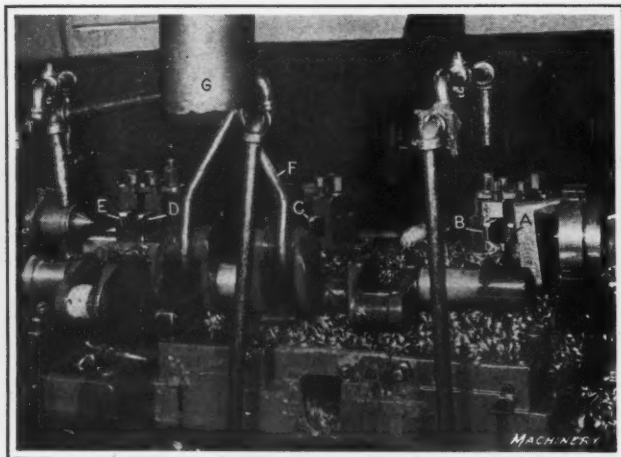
Engine Lathe equipped with Double Carriages and Five Cutting Tools for simultaneously rough-turning All Line Bearings on Crankshafts
